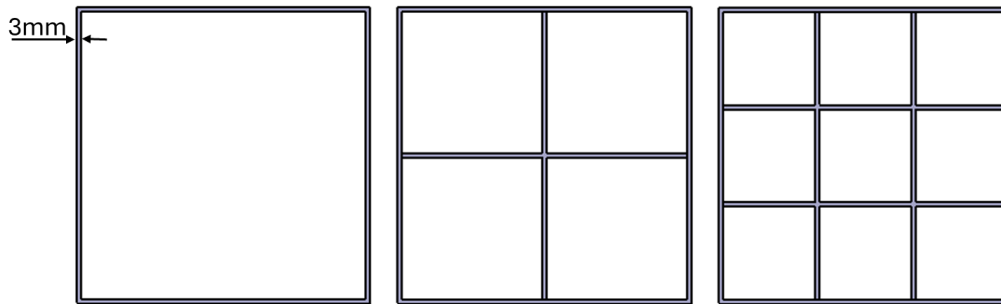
Front view of the inner geometry for the impact attenuator – Design A (Left), Design B (Center), and Design C (Right)
